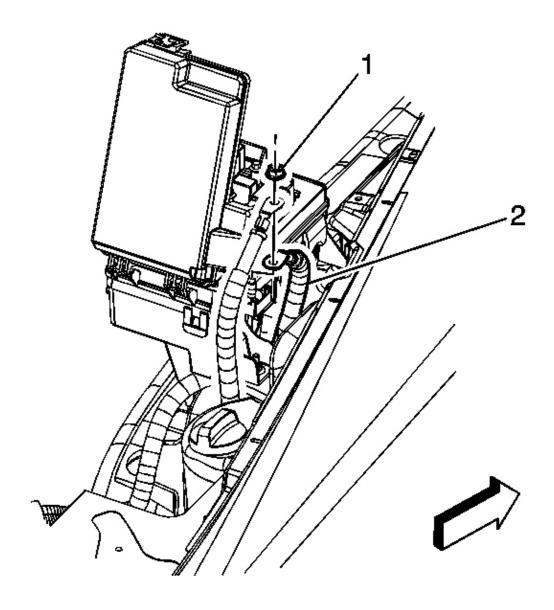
View Of Positive Battery Cable Lead & Nut Courtesy of GENERAL MOTORS CORP.
